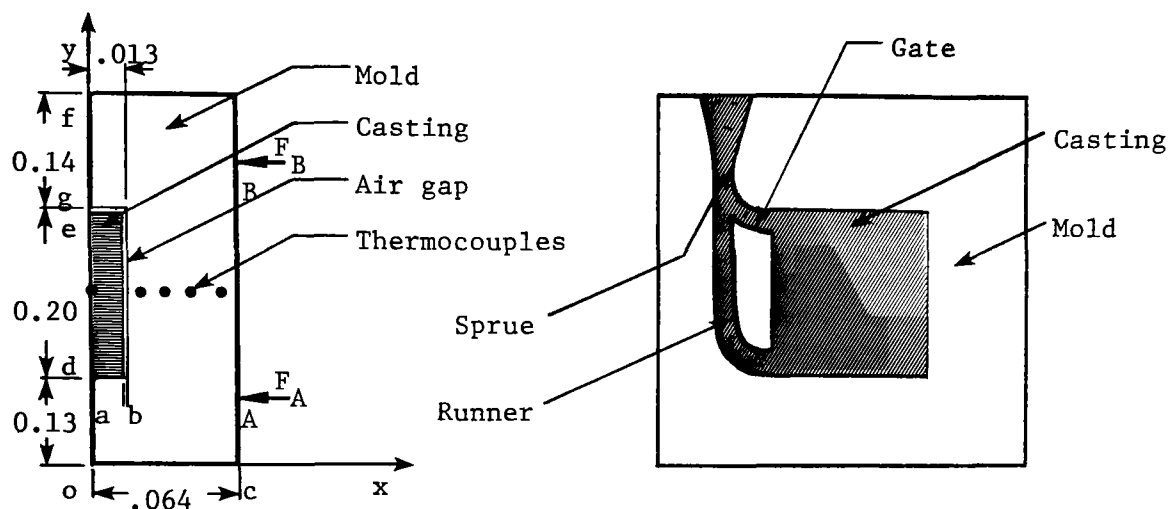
Schematic of a mold half showing thermocouple positions and gating arrangement
